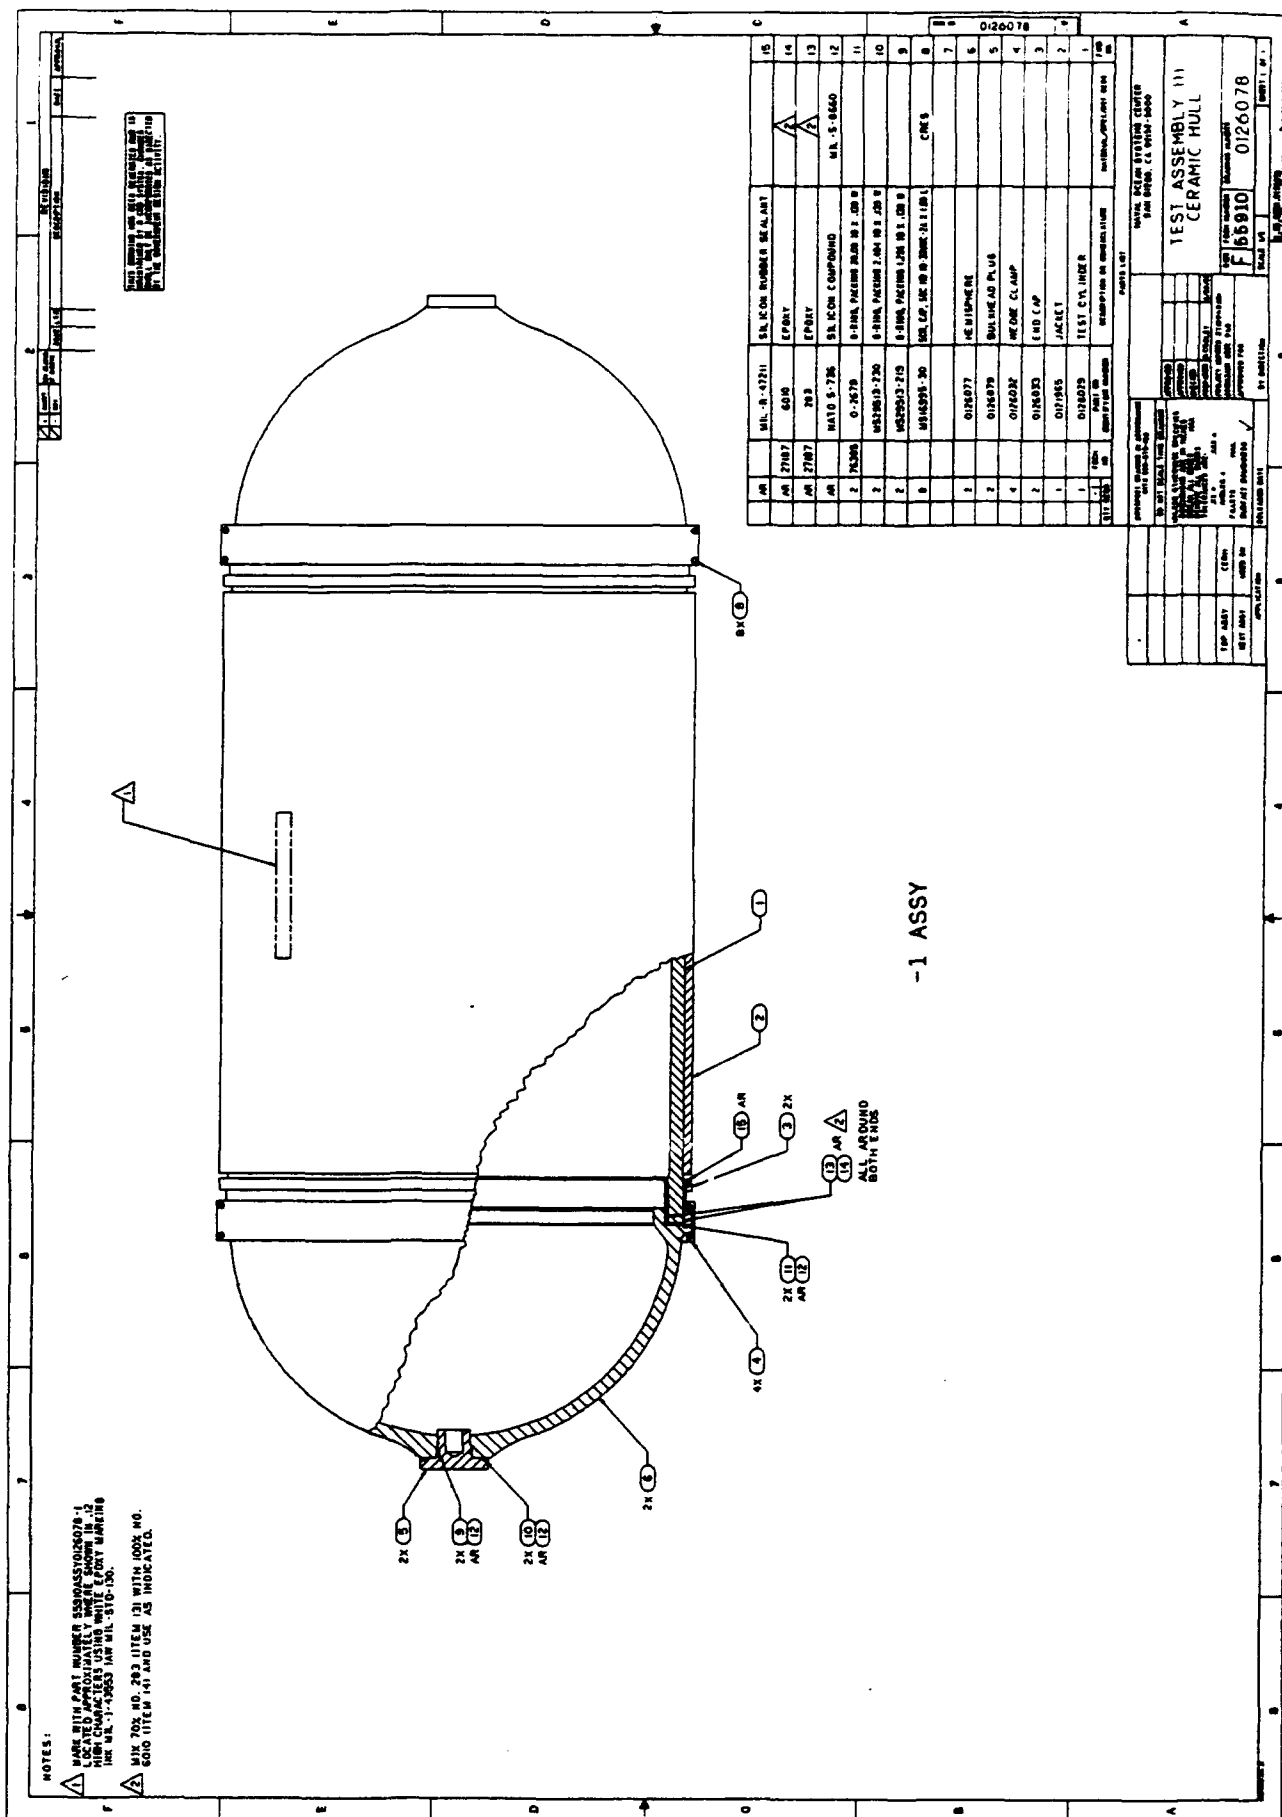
Housing test assembly for pressure testing of 20-inch OD ceramic cylinders.
